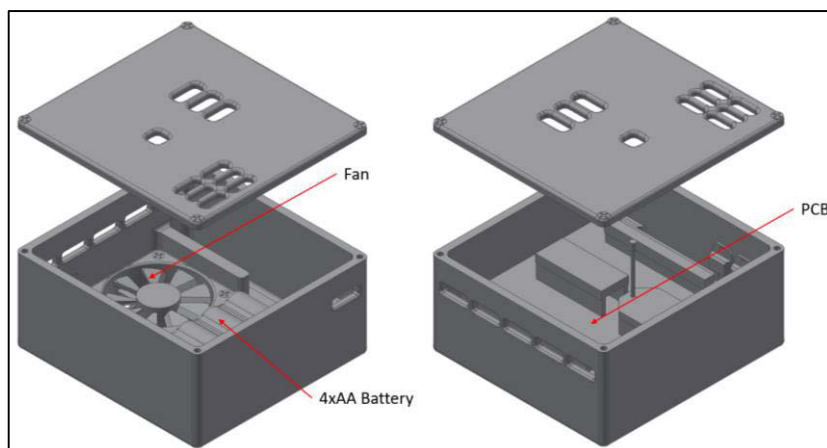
CAD of Case Assemblies (left without PCB, right with)
